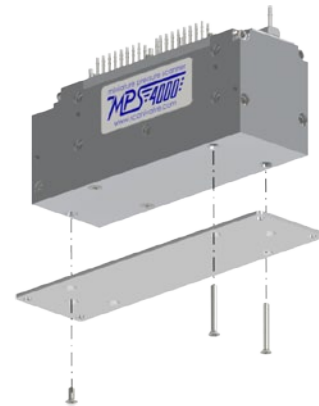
MOUNTING PLATE, BOTTOM
